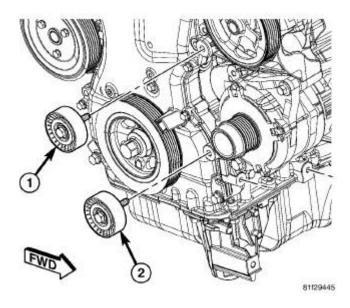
Removing/Installing Accessory Drive Belt Upper & Lower Idler Pulley Courtesy of CHRYSLER GROUP, LLC
